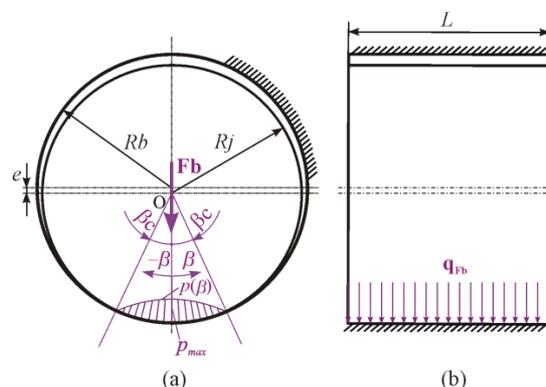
Geometry of the journal-bearing contact: (a) a front view; (b) a side view.
